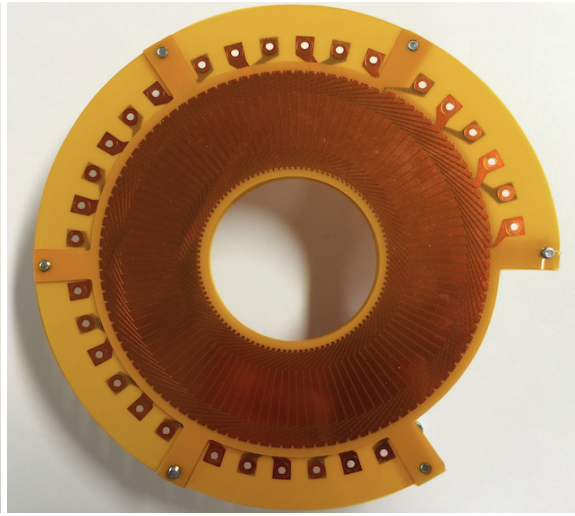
and F.1b show respectively one single PCB constituted of three phases of six loops and one insulation layer. The complete assembly of each part of the armature winding is carried out in three steps. First, the stack composed of the five boards and six insulations is assembled, layer by layer, as shown in Fig. F.2a. Fig. F.2b shows one resulting stack.
